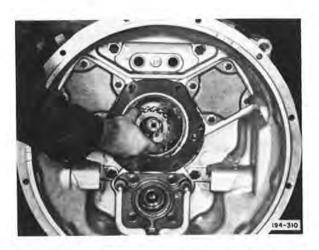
Removing Fourth/Fifth Speed Sliding Clutch
